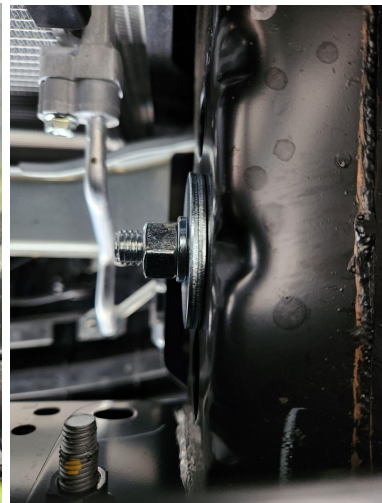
Spacer inside chassis. Figure 8: Bolted through chassis. Figure 9: Two washers.
